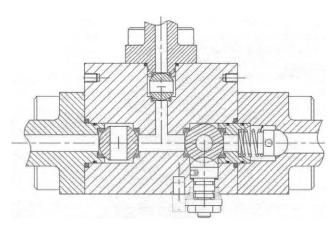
Cross-section through a typical process block and bleed valve Courtesy of Sabre Instrument Valves Ltd
